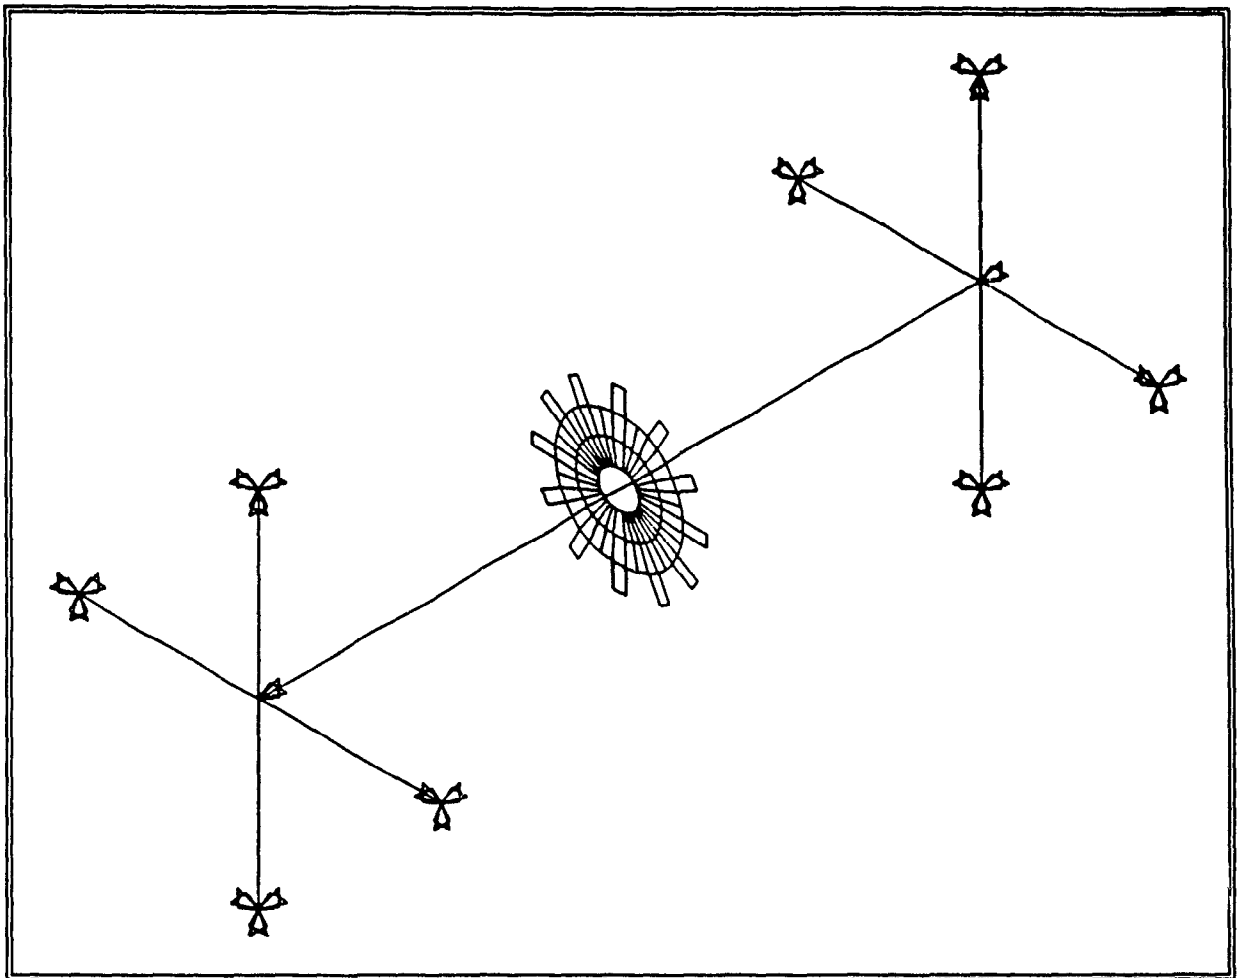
Finite Element Model of the Turborotor Assembly
